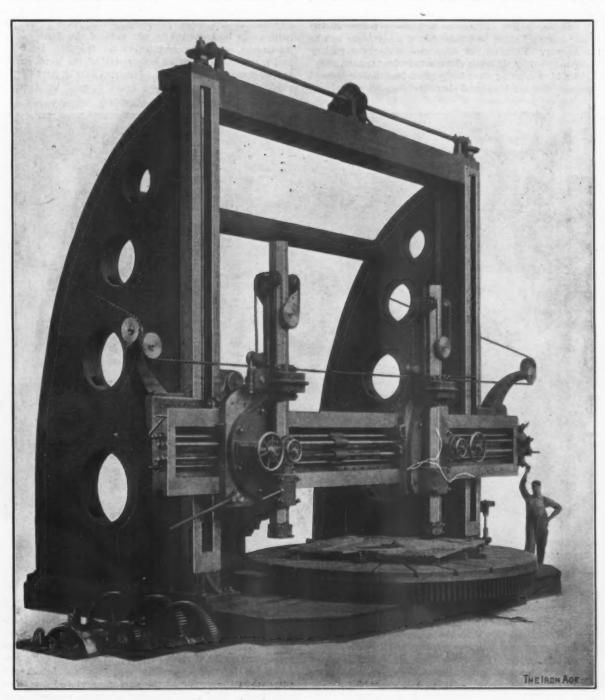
The Largest Tool in the Machine Shop, a Boring and Turning Mill with 20-Foot Swing.
